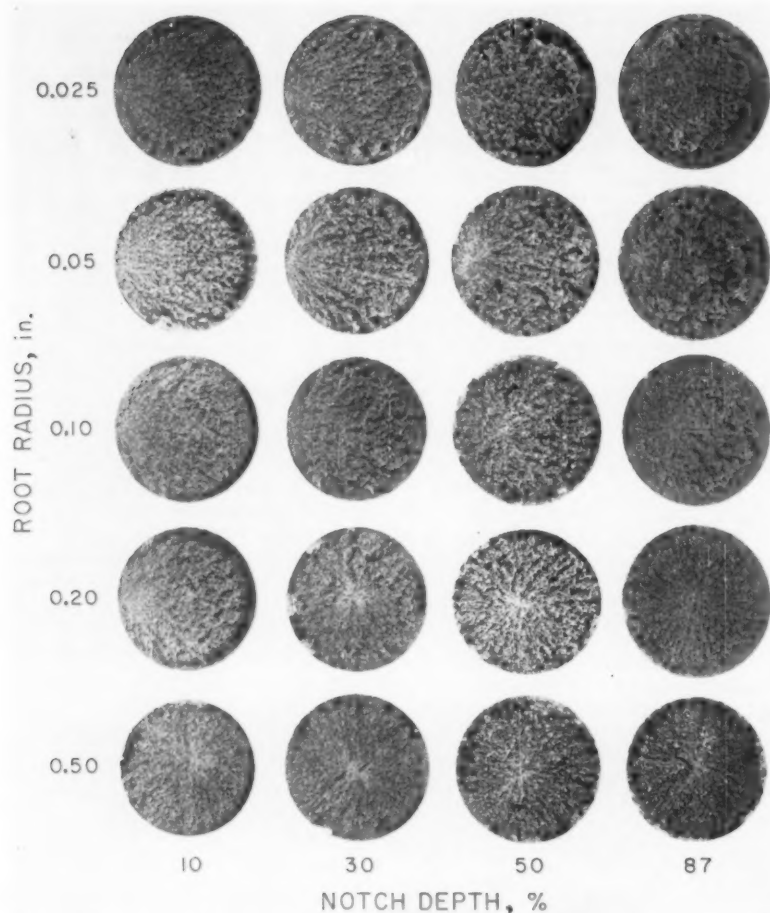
Fracture surfaces of notched specimens of titanium that were extended to fracture at -196°C ($\times 2.5$).
